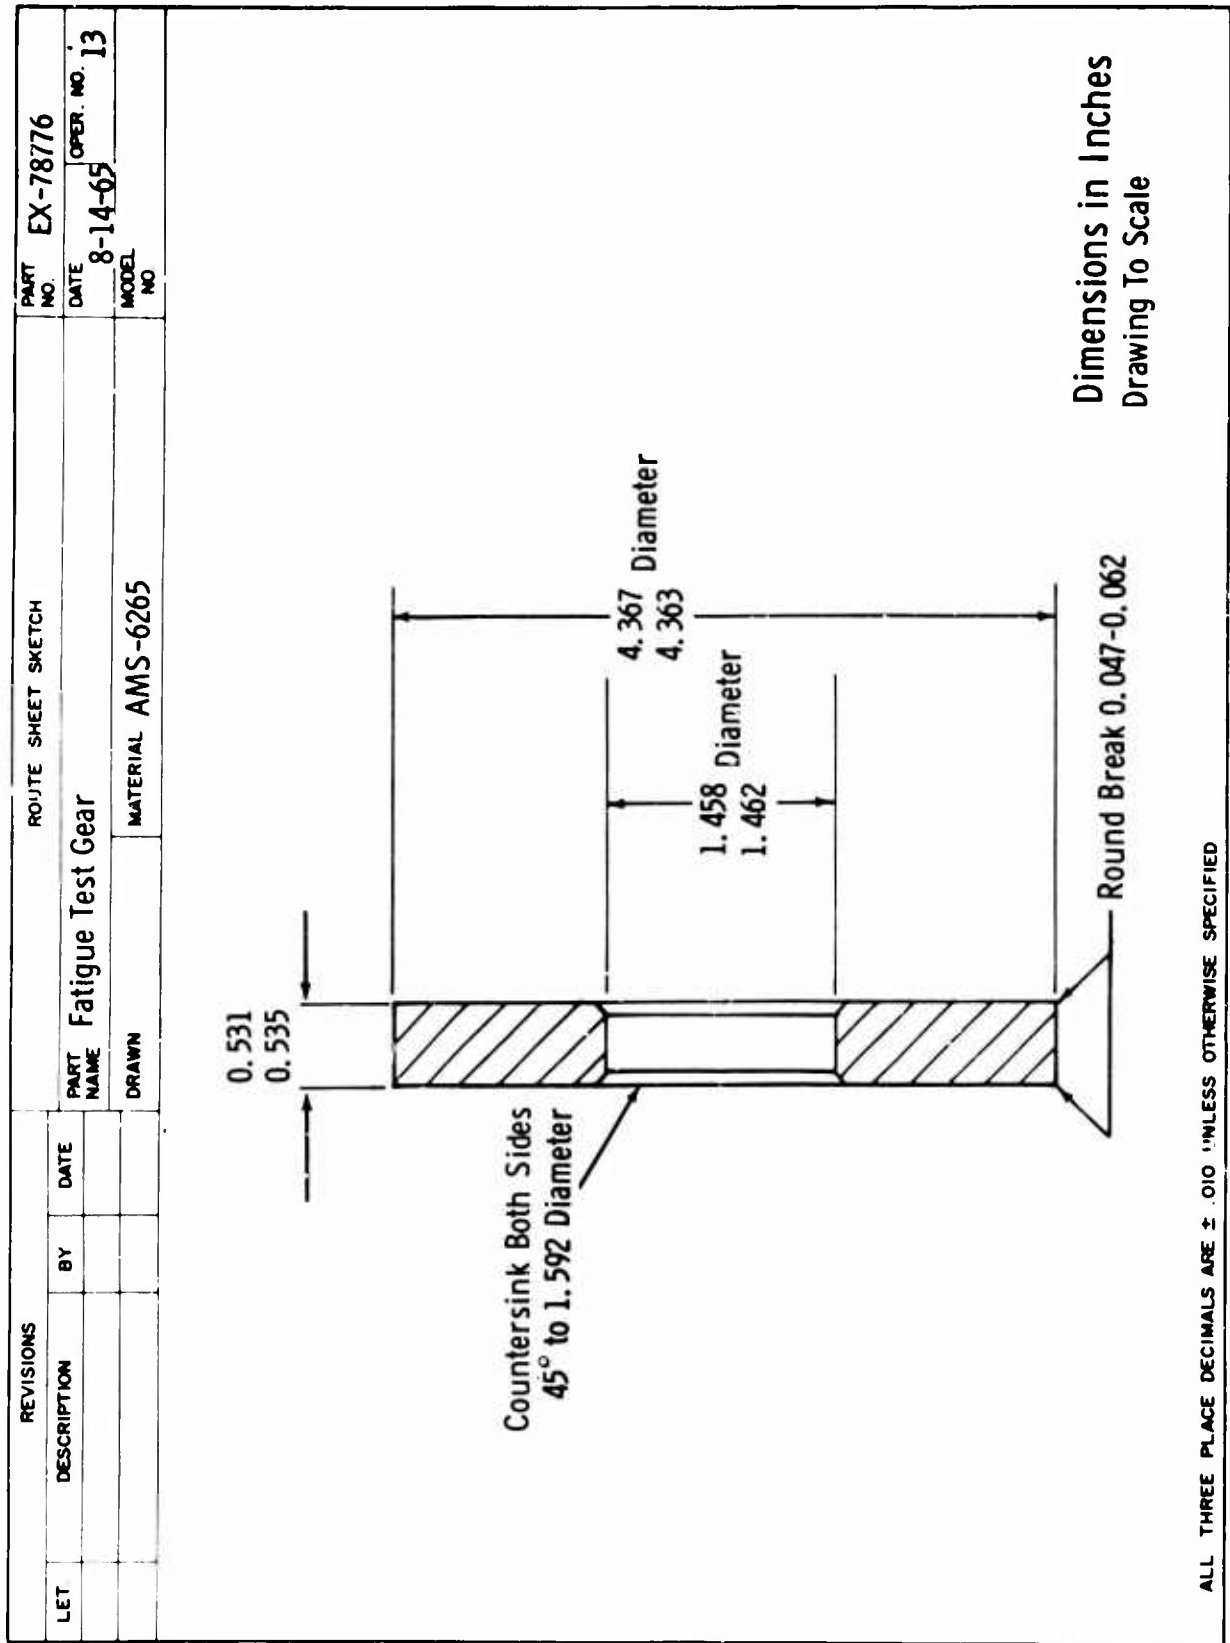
Typical Routing Sheet for Protuberant Hobbled Gear, EX-78776 (Sheet 7 of 9).
